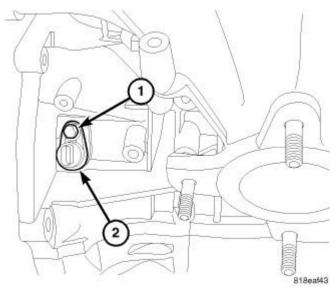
Crankshaft Position Sensor & Bolt Courtesy of CHRYSLER GROUP, LLC
